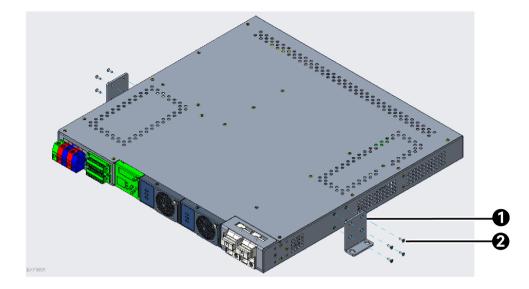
Side View Wall Mount: Solar Add-On Shelf with 19-inch Mounting Brackets
